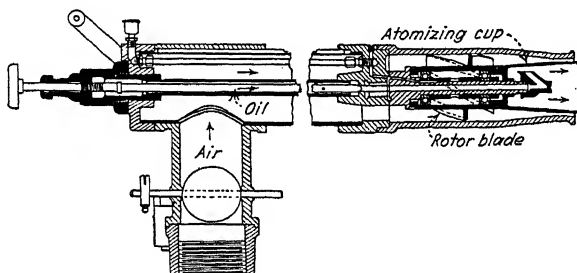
Cup-type nozzle with impeller vanes for compressed-air drive.
